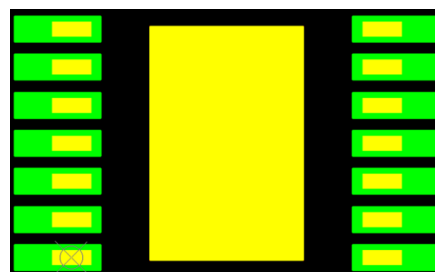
SO-14 on PWP0014L PCB Pad, Yellow: Other SO-14 leads, Green: TI PWP0014L PCB Pad
